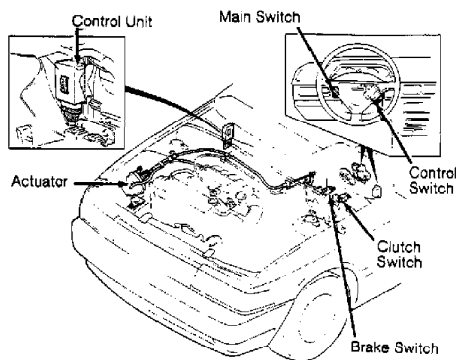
Locating Cruise Control Components (Protege & 323)
